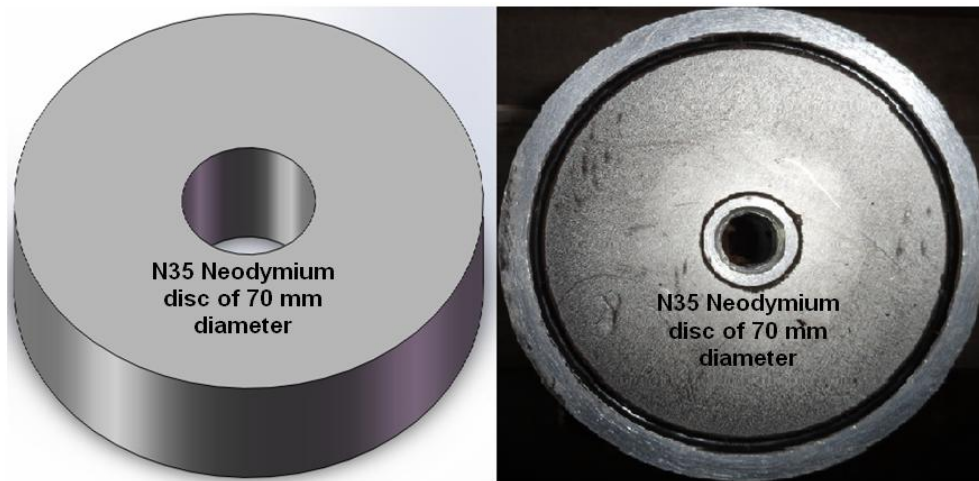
N35 Neodymium ring of 70 mm diameter of 90 mm diameter magnetic pot used for table, knee and saddle to machine column assembly
